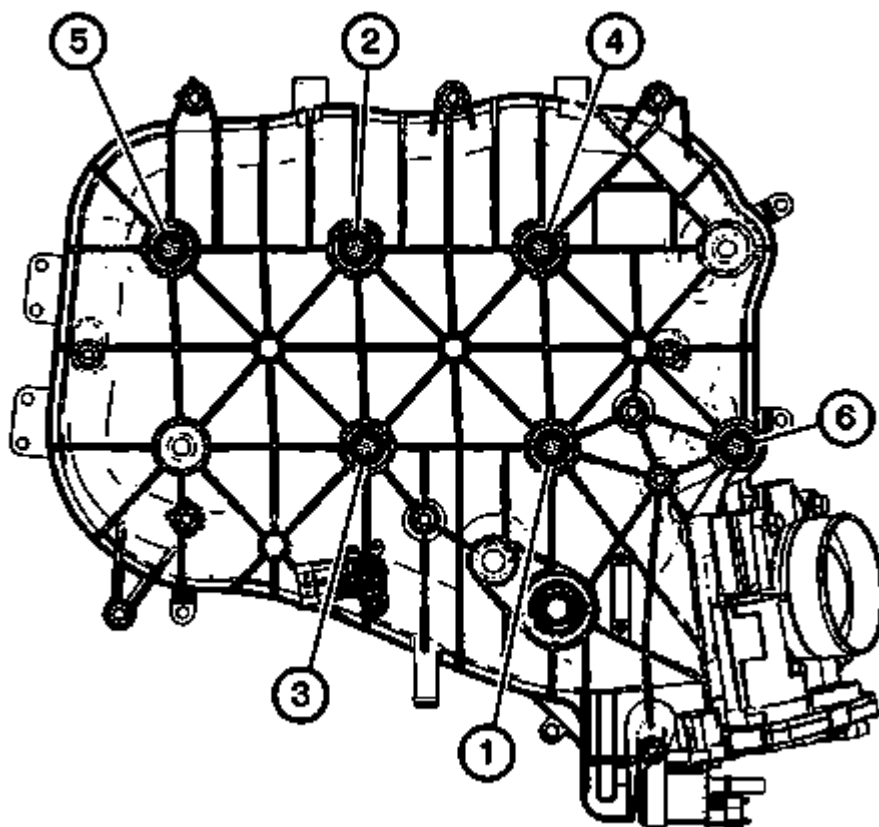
Identifying Intake Manifold Bolt Tightening Sequence
